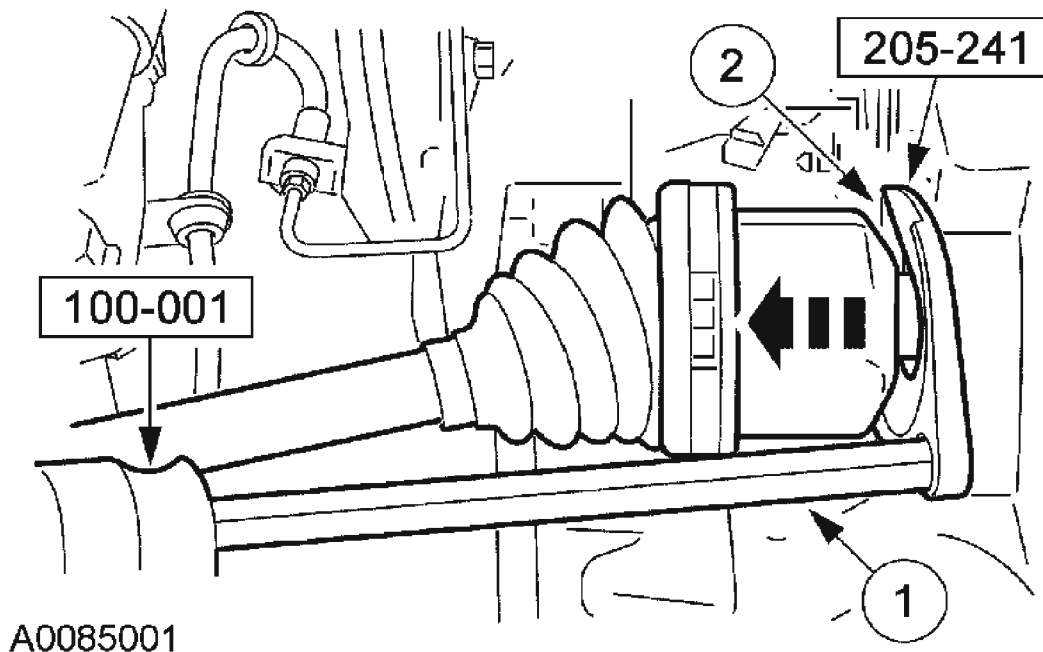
Removing LH Front Drive Halfshaft From Transaxle
